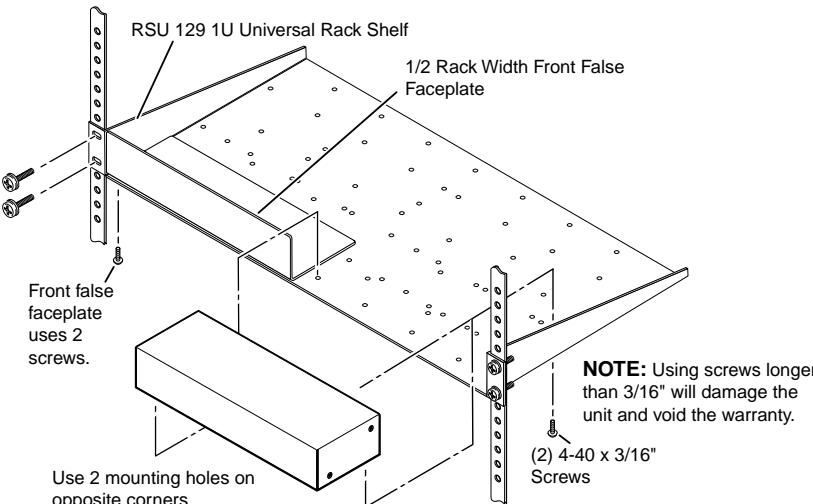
Mounting the switcher on a standard (9.5-inch) rack shelf
